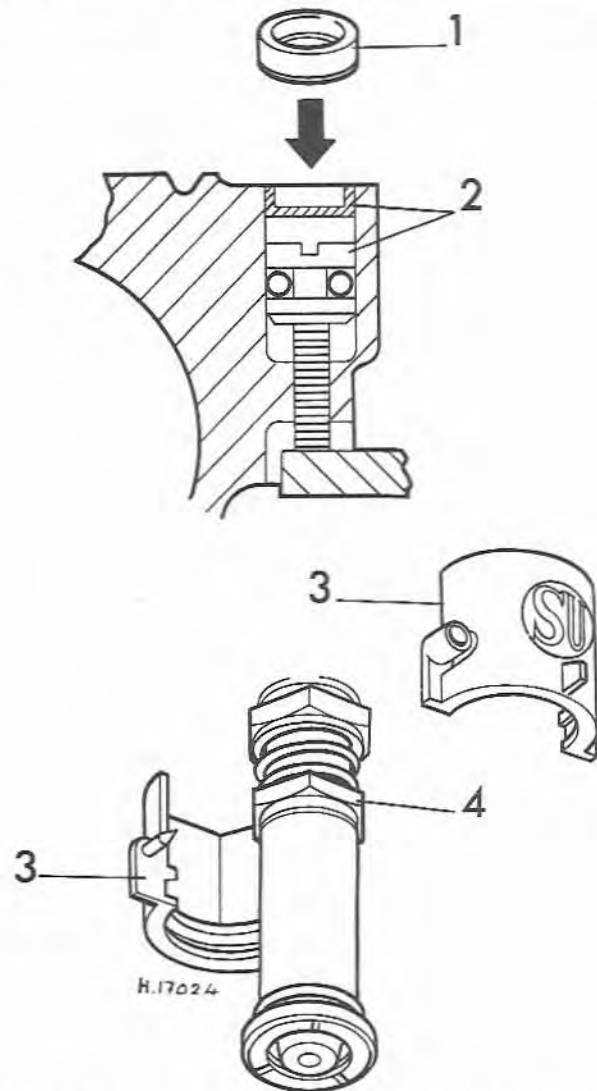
Tamperproof cap and clamp fitted to later models (Sec 2)
